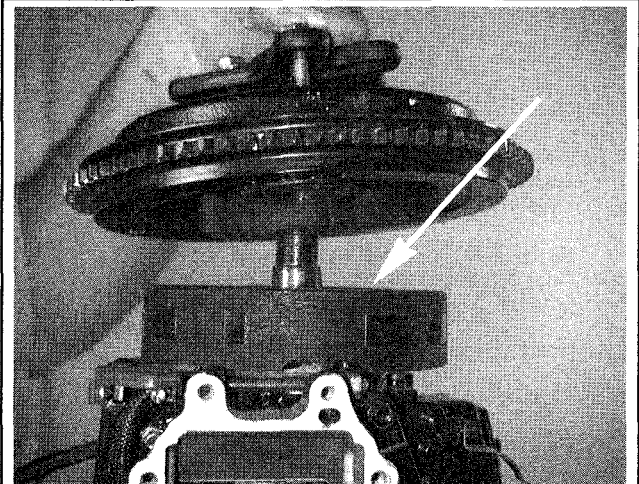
The stator battery charge coil is mounted directly underneath the flywheel
